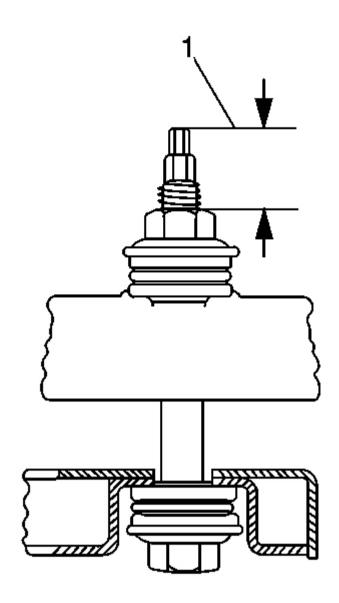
Transverse Spring, Nuts & Bolts Courtesy of GENERAL MOTORS CORP.
